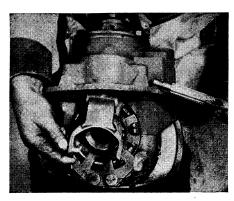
Pull out shift fork shaft. The shift fork may then be slipped from the sliding clutch gear and removed through the back of the differential carrier
